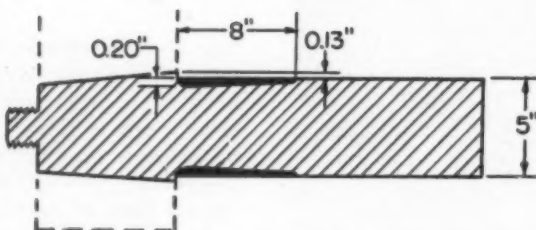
Above—Shaft hardfaced to resist gland packing wear and corrosion. Heavy end of deposit operates in a corrosive medium
